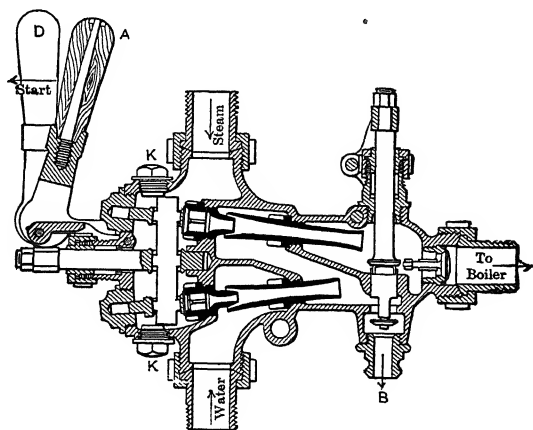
DOUBLE-TUBE NONAUTOMATIC LIFTING INJECTOR
